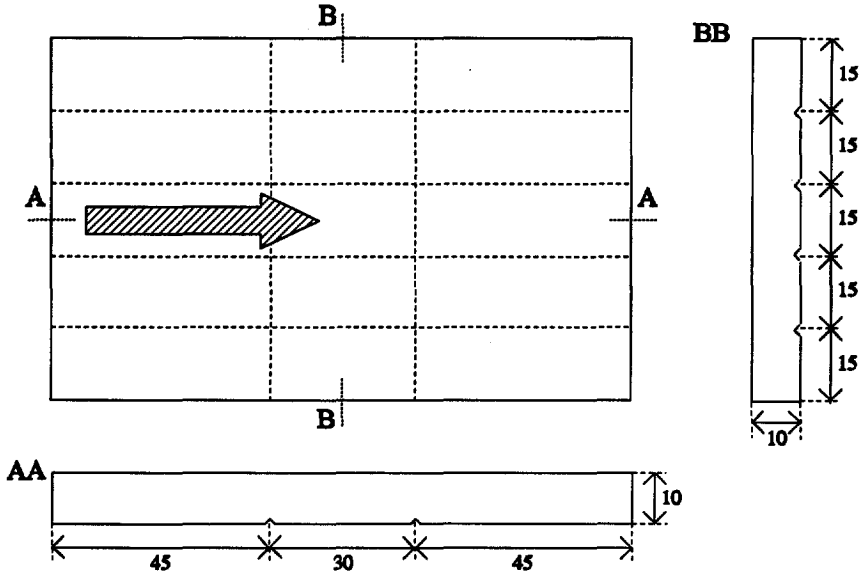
Test plate configuration (mm) used to estimate the hydrogen redistribution after welding. The direction of welding is indicated by the arrow.
